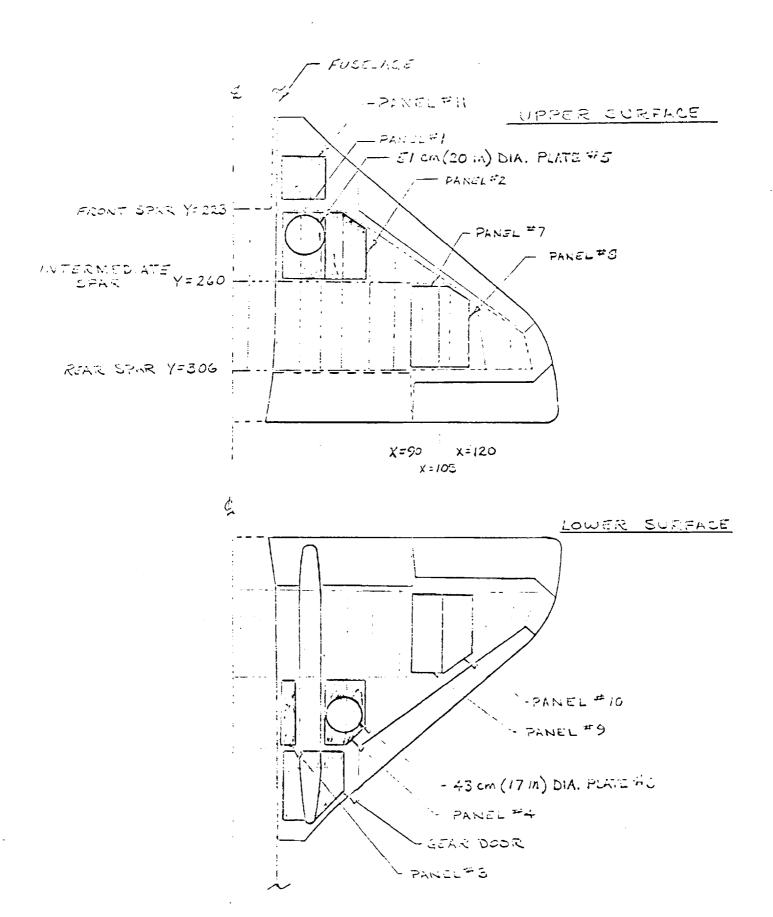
HOLE CONFIGURATION #13. ALL INBOARD PANELS & PLATES REMOVED; GEAR DOOR OPEN
